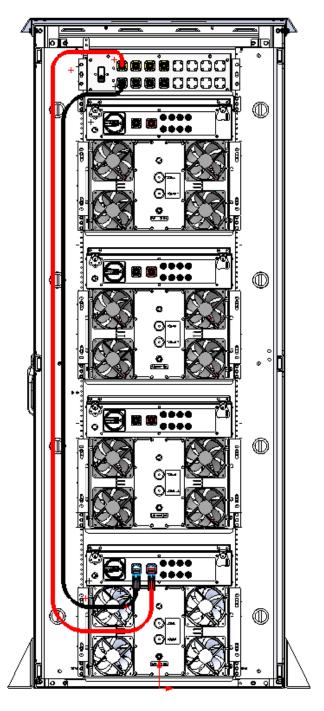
SURLOK CABLING ROUTED TO PRIMARY (INPUT) FEED #4
